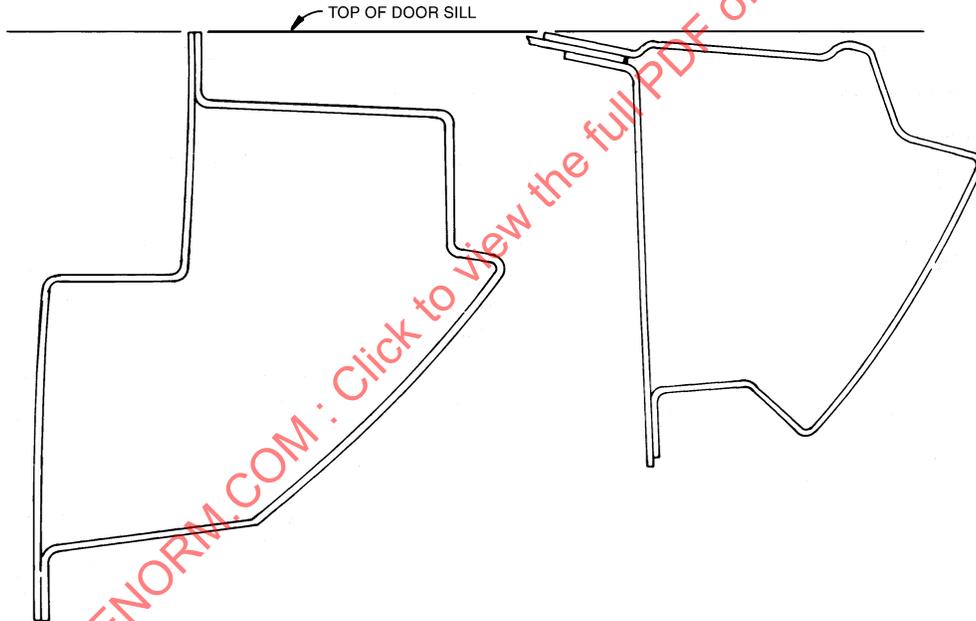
TYPICAL CROSS SECTION ROCKER PANELS
